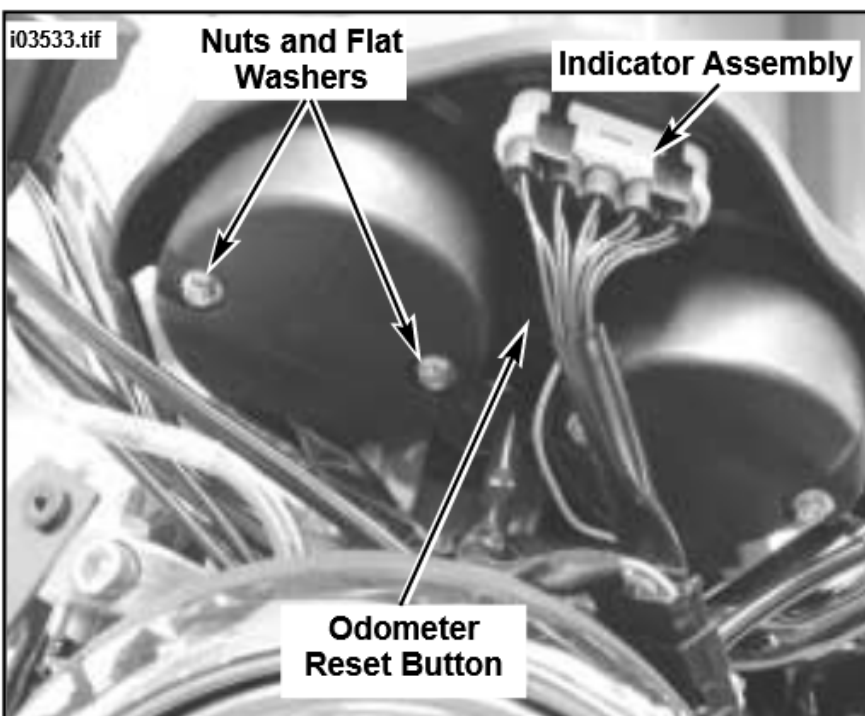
Install Indicator, Odometer Reset Button and Secure Tachometer/Speedometer to Panel
